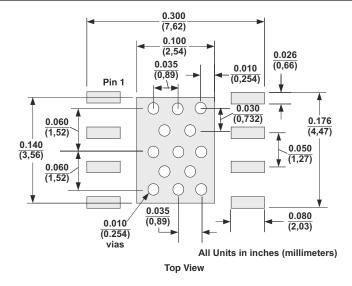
DDA PowerPAD PCB Etch and Via Pattern
